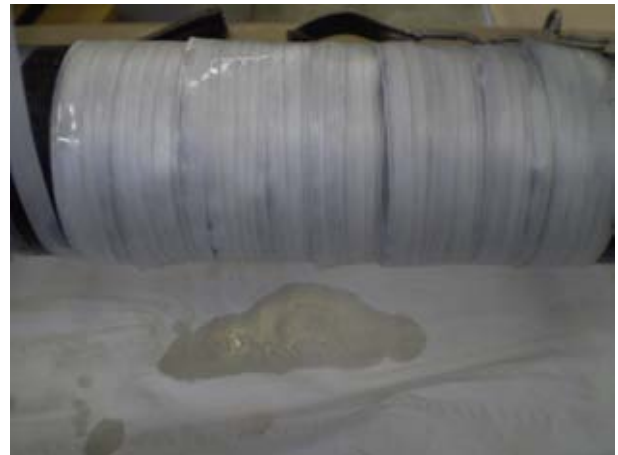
photograph showing the bubbling of the fabric occurring on the whole tube during the winding of the second layer.
